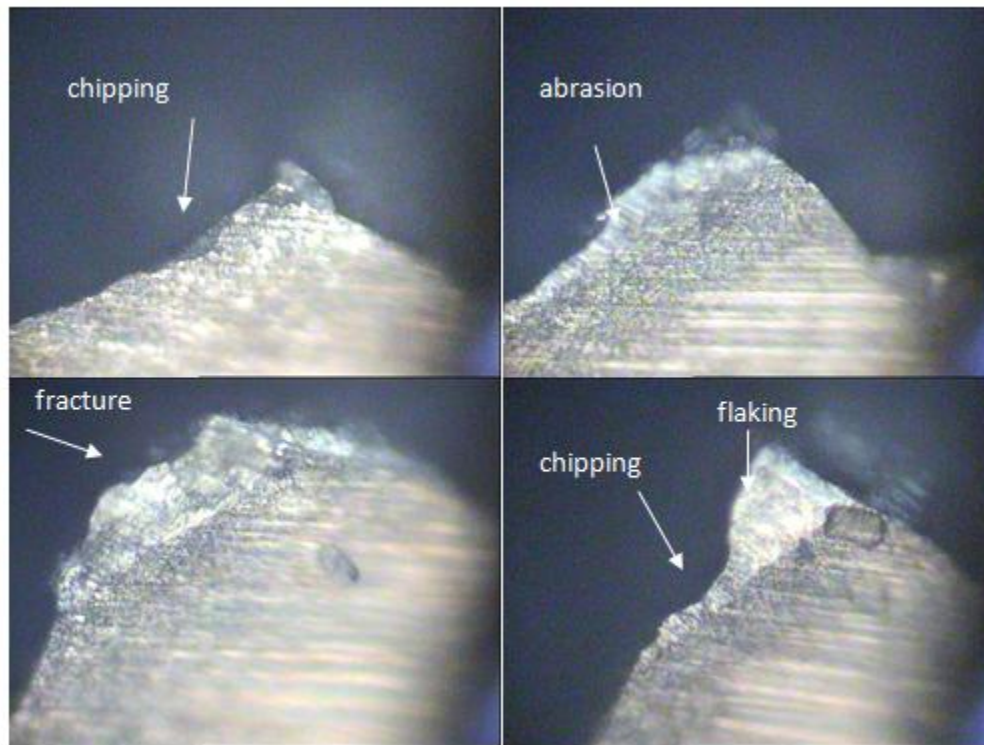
Microscopic views of flank wear under 40x magnification milling with cold air
